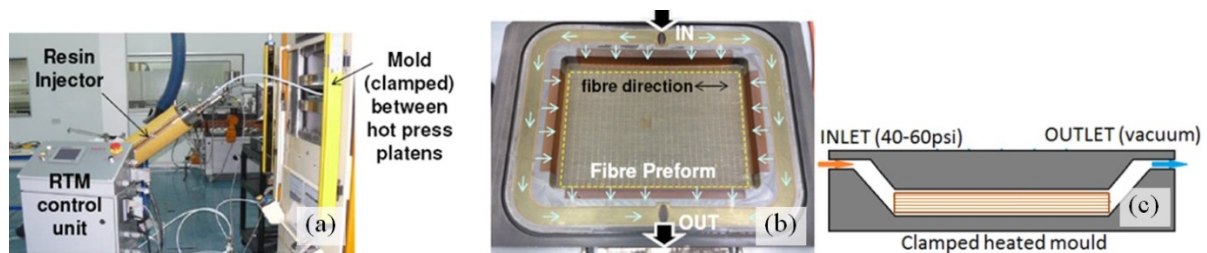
RTM process: (a) set-up, (b) in-mould top view and (c) side view
